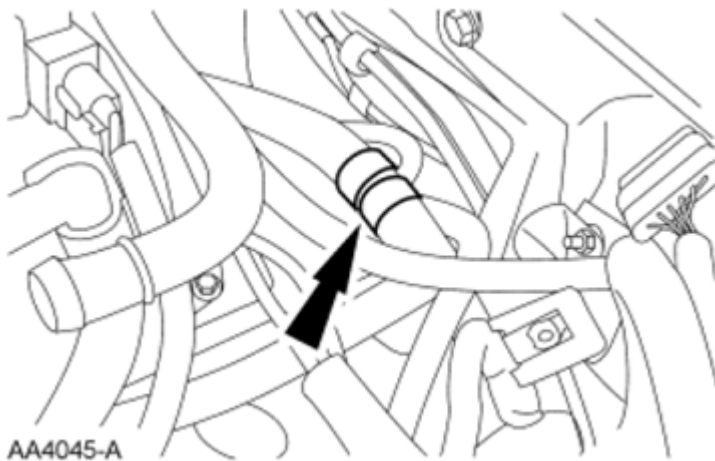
Locating Camshaft Position (CMP) Sensor Electrical Connector
